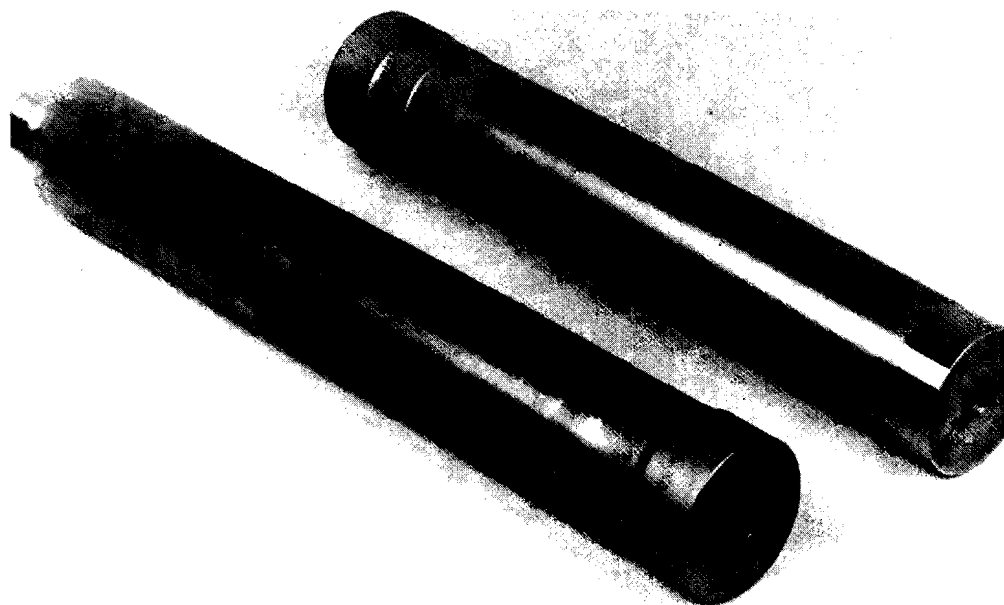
COLD HYDROSTATICALLY EXTRUDED MARAGING 250 STEEL CASES WITH END CAPS WELDED IN PLACE FOR BURST TESTING
